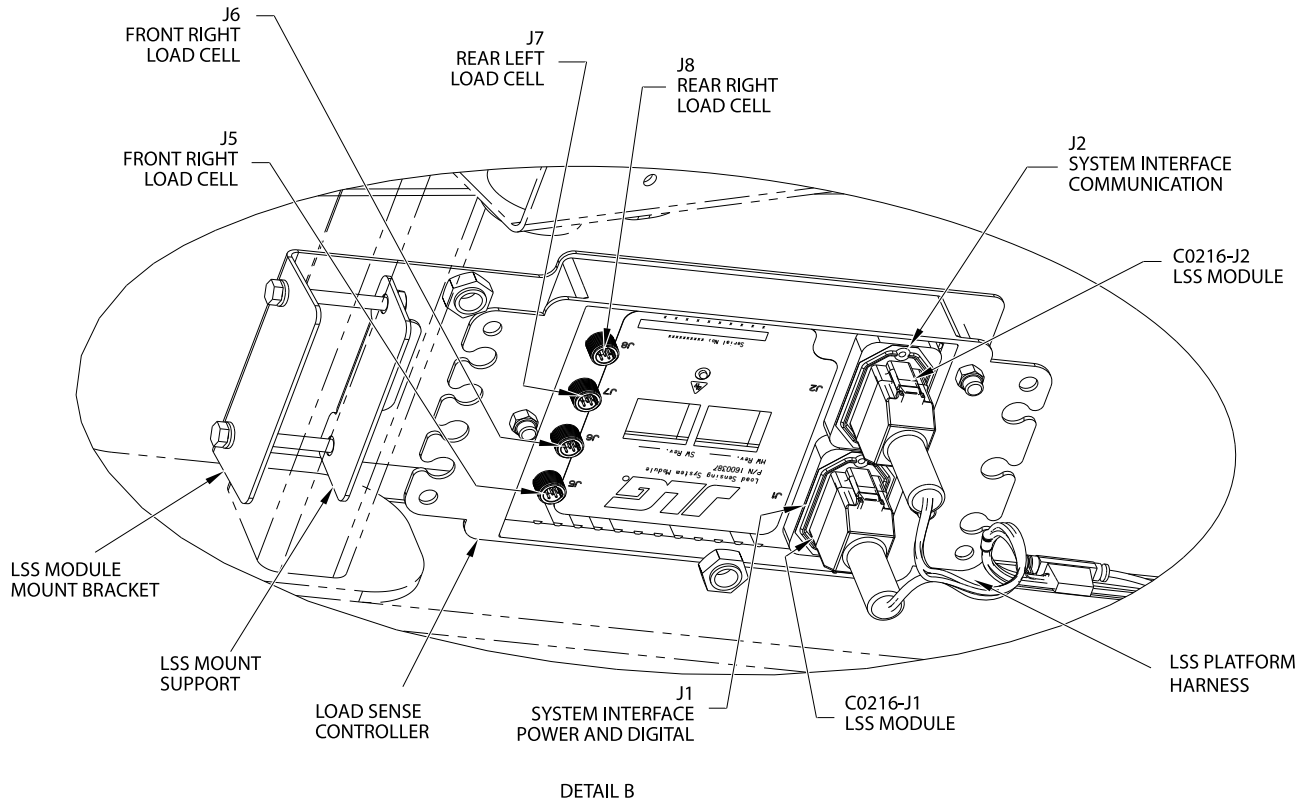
LSS and Platform Assembly - Installation/Removal - Sheet 2 of 4
